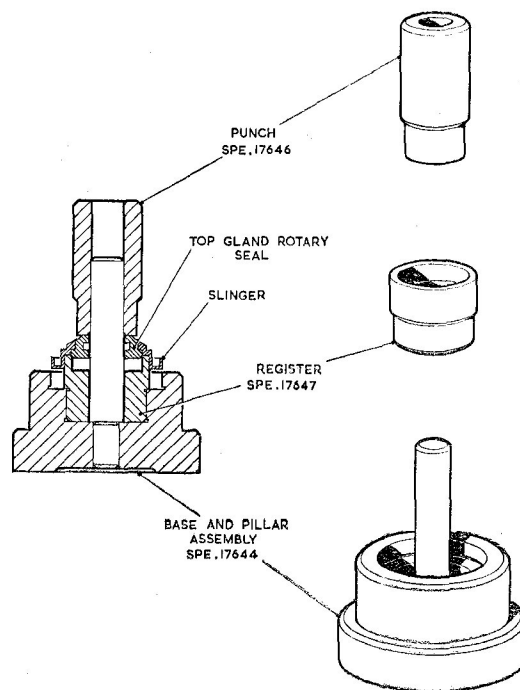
Tools for dismantling the upper rotary seal/slinger sub-assembly
